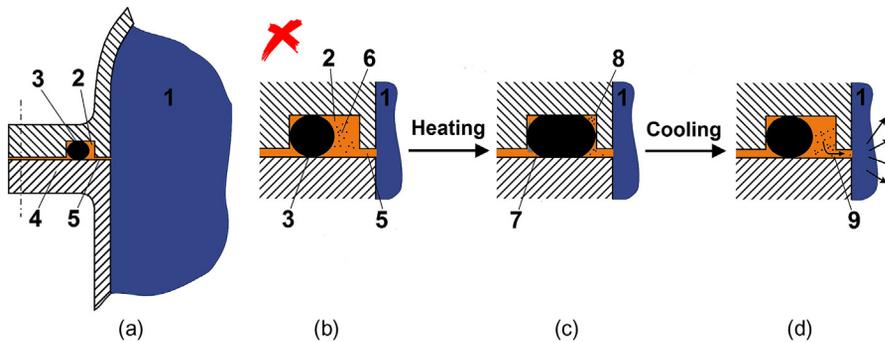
(a) A conventionally designed right-angled groove (2) contains an O-ring (3) that is compressed between the sealing faces of two stainless steel surfaces (4) to separate the product area (1) from the outside. (b) Such a rectangular groove-O-ring design invariably creates gaps and crevices (5) that are impossible to clean in-place and/or to sterilize in-place. The groove provides sufficient space for microorganisms (6) to enter via the crevice. (c) During heating, due to the difference in thermal expansion between metals and elastomers, the O-ring will expand (7) to cover an increasingly larger surface of steel, protecting microorganisms (8) trapped between the O-ring and the steel surface against contact with hot water, chemical solution or steam. (d) After cooling down and shrinkage of the seal, the surviving microorganisms may be released (9) and will multiply and contaminate the product (Lelieveld et al., 2003; Hauser et al., 2007).
